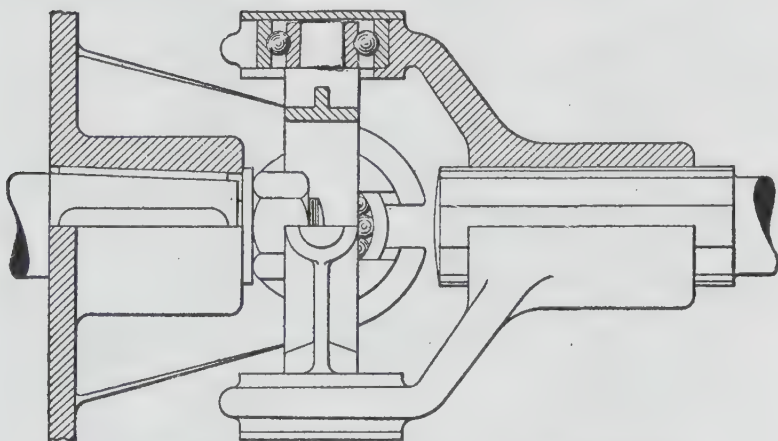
LANCIA BALL BEARING UNIVERSAL JOINT.
